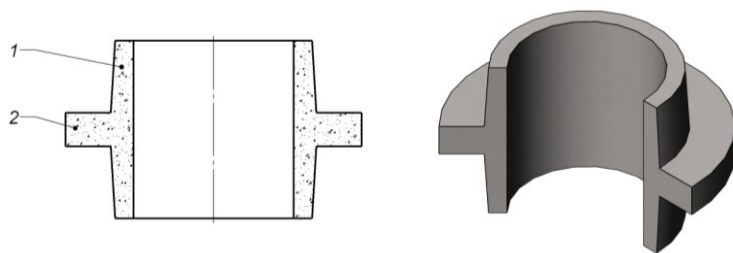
Example of thermal insulation insert design for a mold with a circular cross-section.
